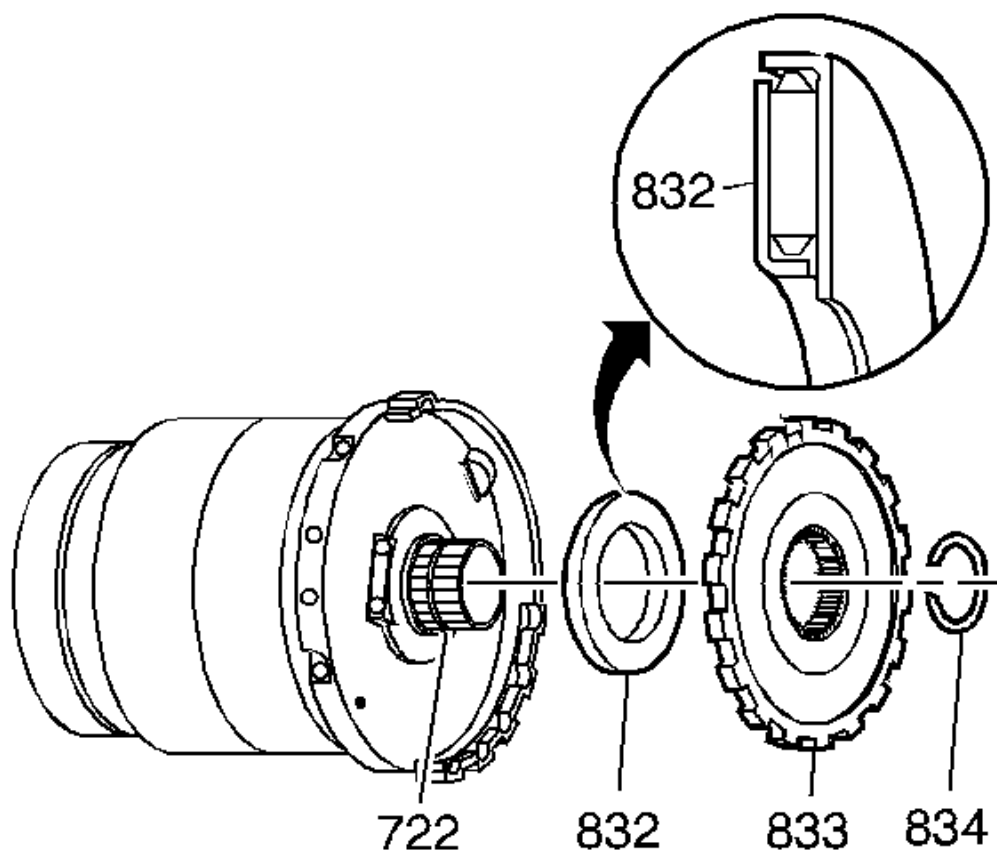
Identifying Parking Lock Gear And Final Drive Sun Gear Shaft Components
